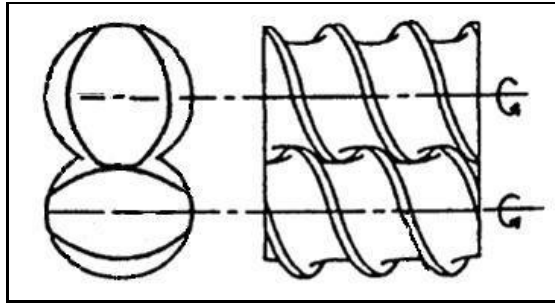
Screw geometry of a self-wiping co-rotating intermeshing extruder
